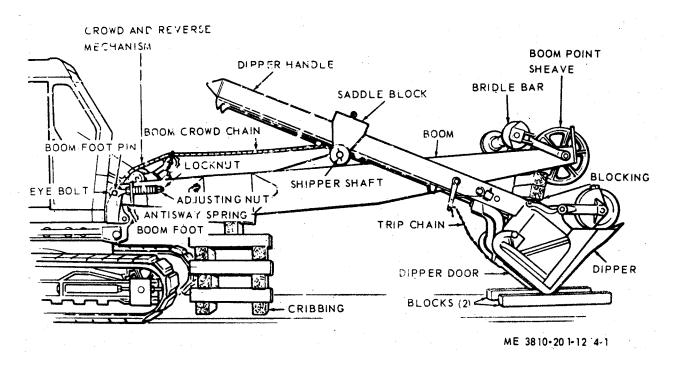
Shovel front end attachment, cribbed for removal or installation.
